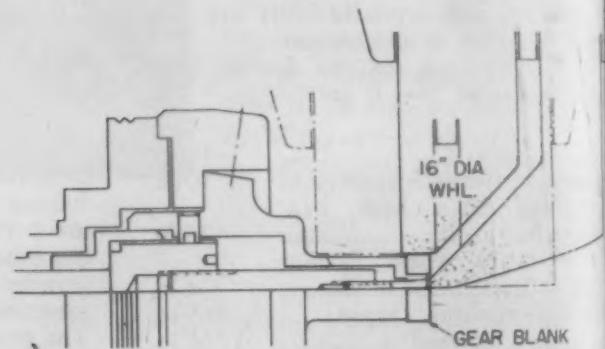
Set up for grinding the OD face of a gear blank in one plunge-cut operation using two grind wheels on the same wheel spindle. (Courtesy: Landis Tool Co.)
